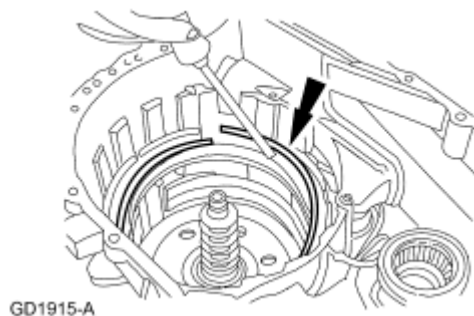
Low/Reverse Clutch Return Spring Retaining Ring
